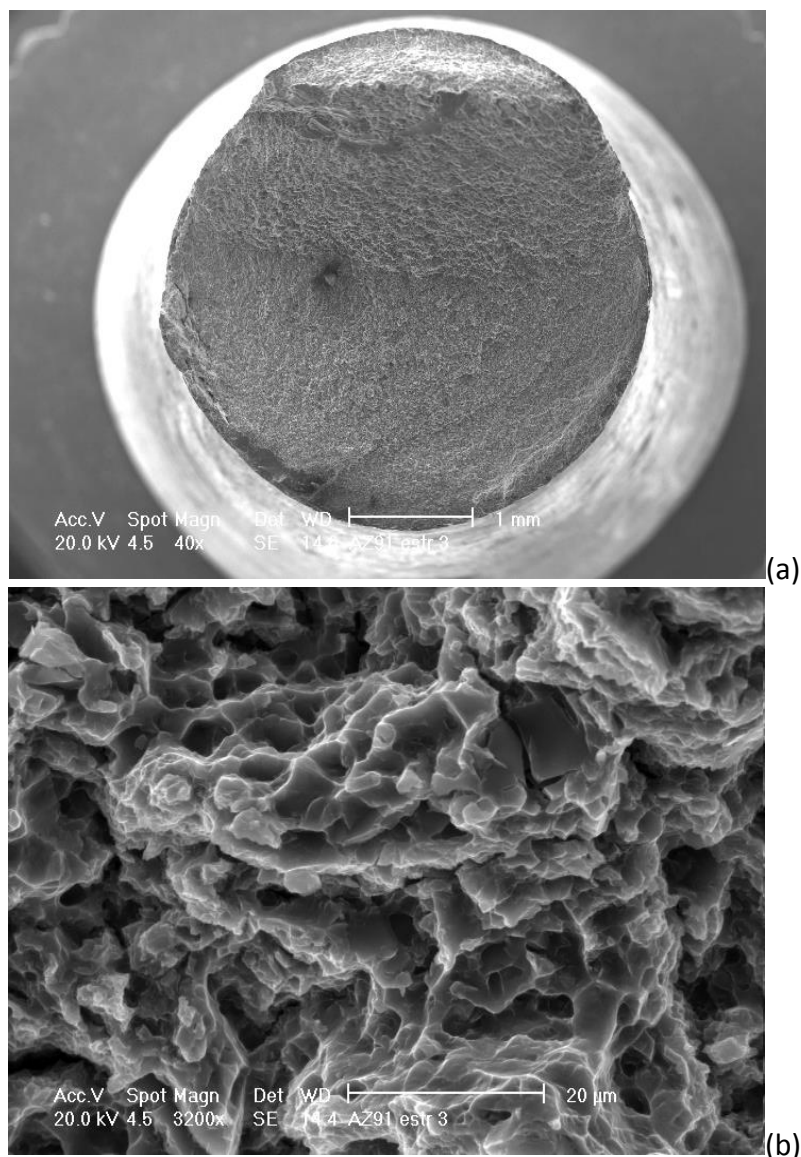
Fracture surface images obtained by ESEM.
